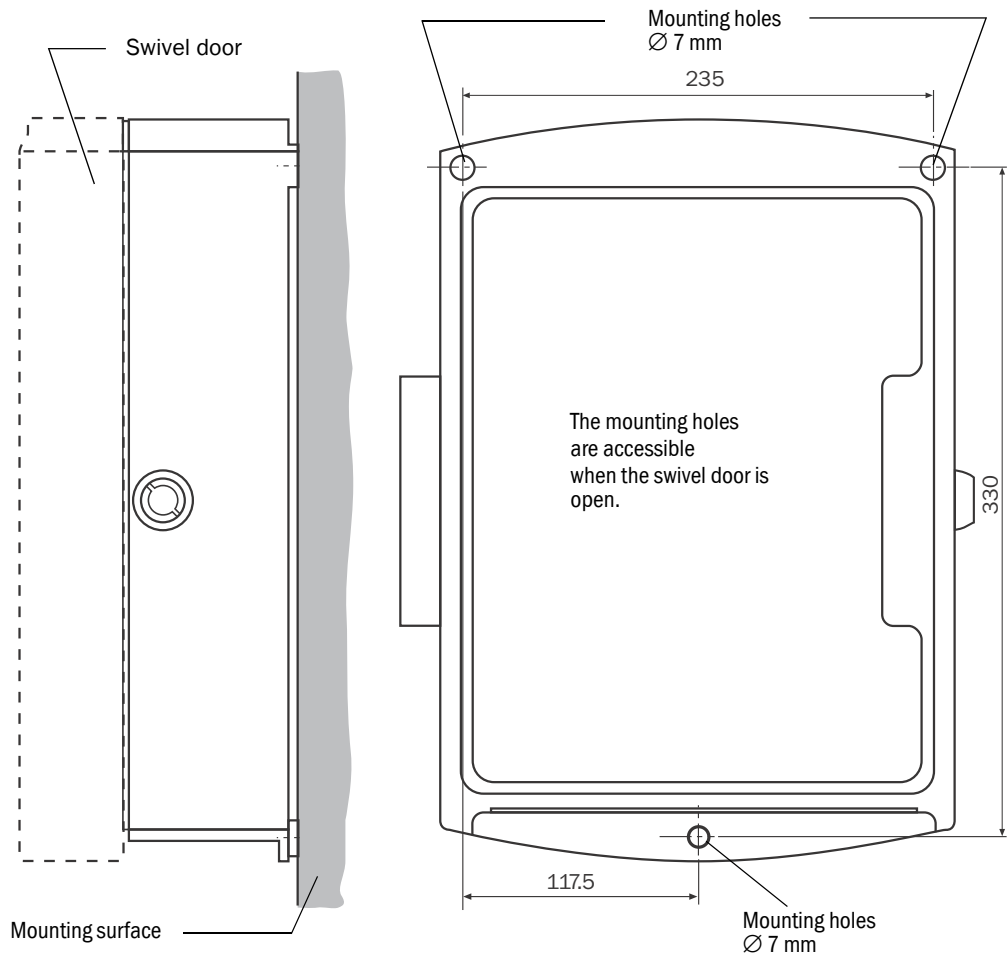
Mounting holes layout (Drilling plan) to fit the EvU (cast enclosure)
